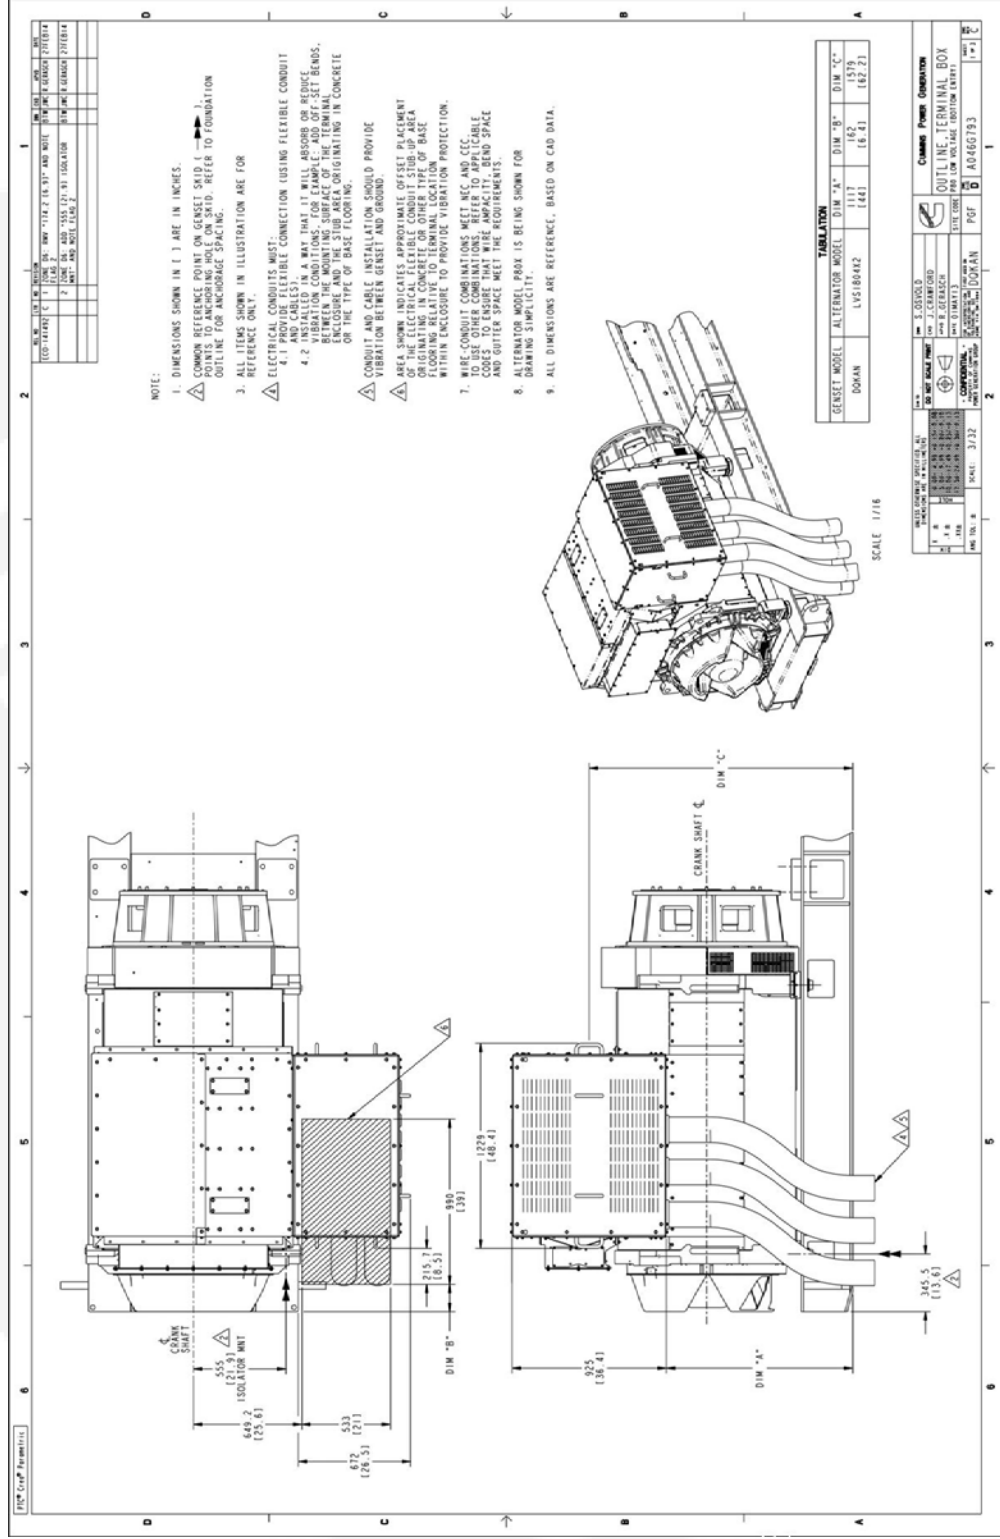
TERMINAL BOX OUTLINE, INSTALLATION CONNECTIONS (SHEET 2 OF 2)
